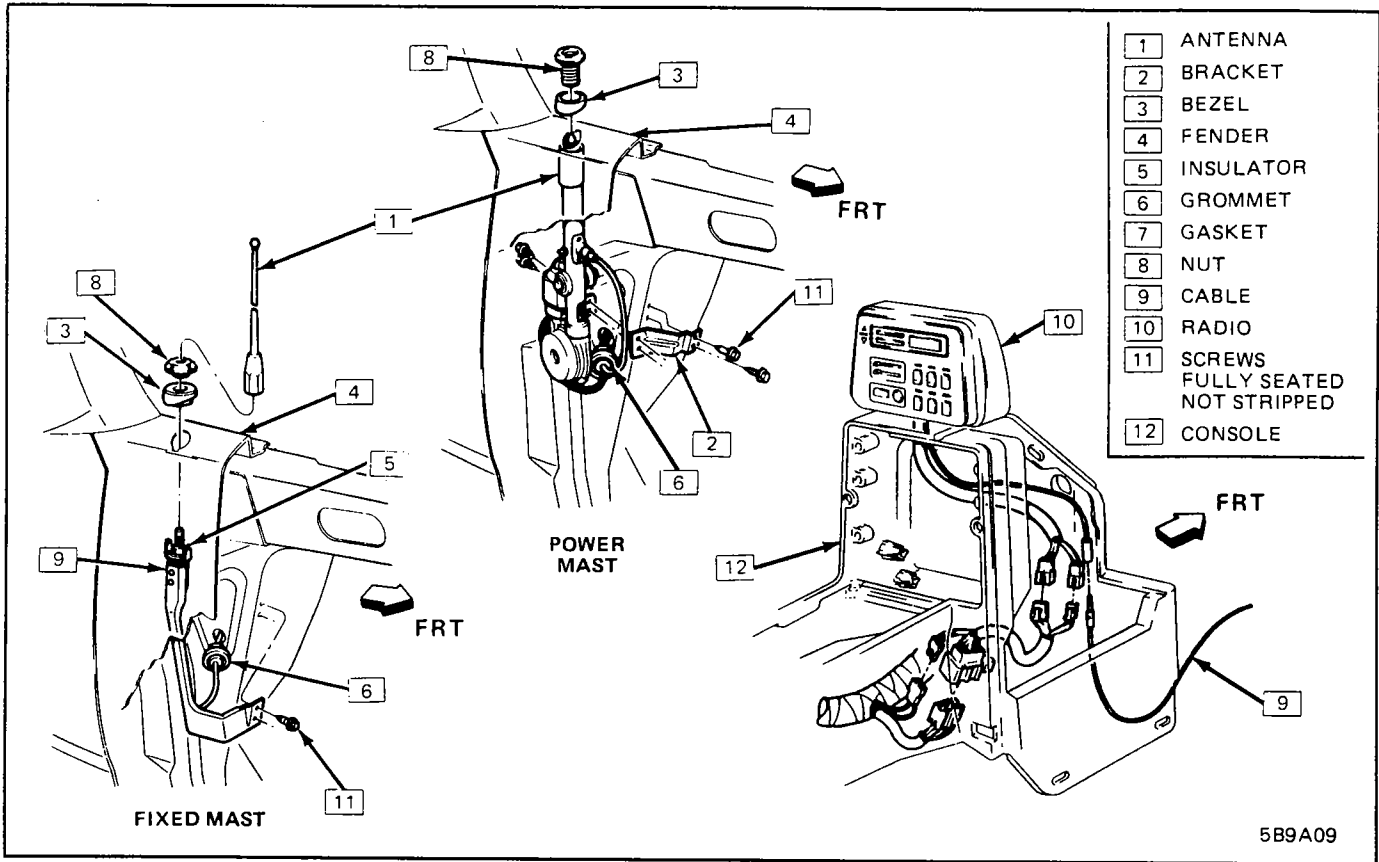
A-63 Antenna Mounting & Cable Routing (N Carline)
